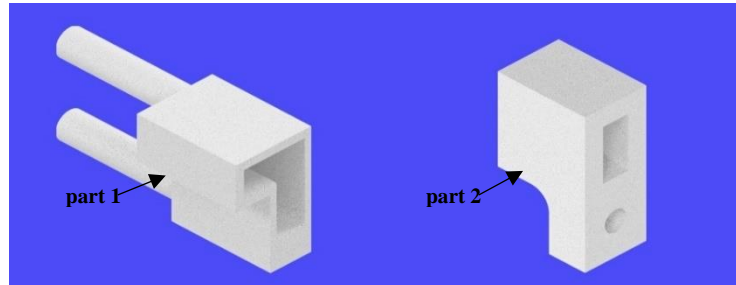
CAD drawings of the 3D-printed parts used to support the digital caliper throughout the evaluation of the Y-stage.
